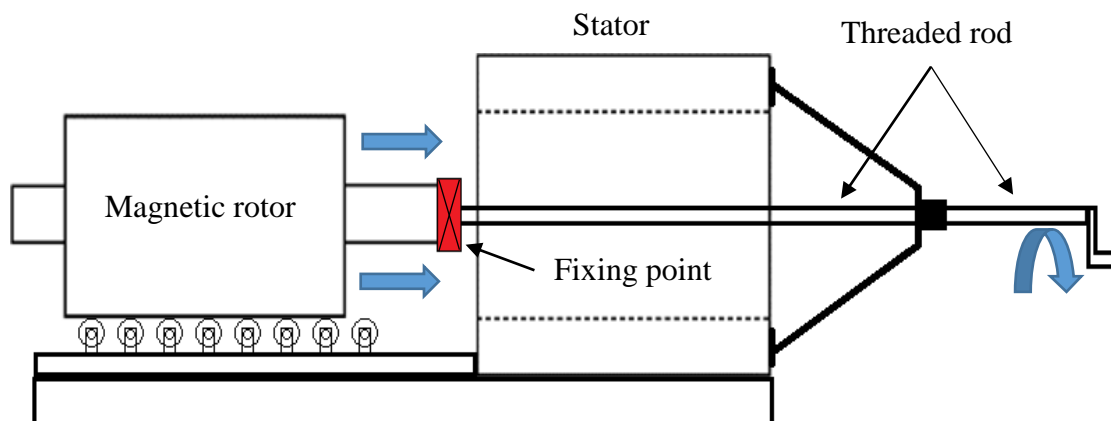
Assembly jig with a threaded rod pull instrument assembled to the rotor shaft through the stator.
